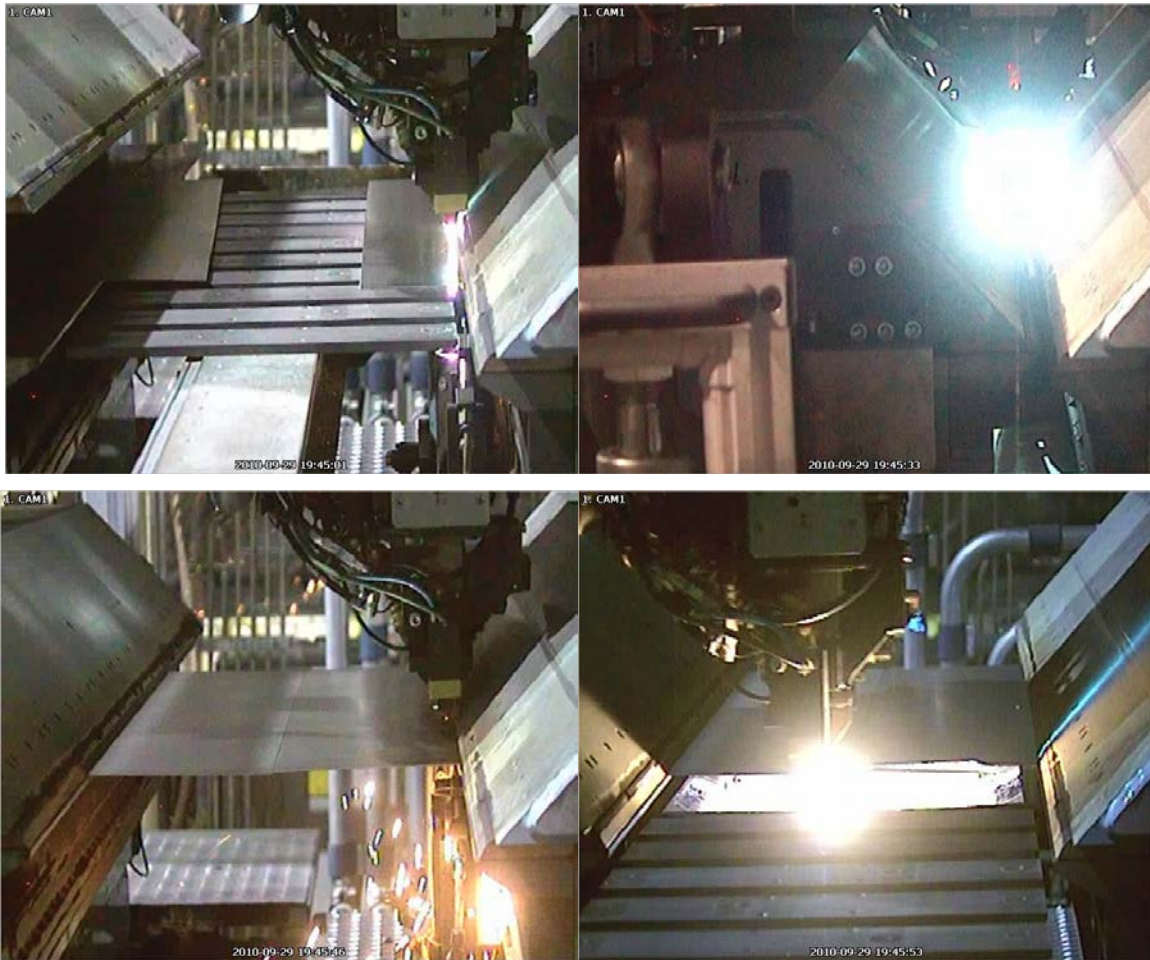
The welding of two coils in detail. Cutting (top left), welding (top right), hole cutting (bottom left), and notching (bottom right) are all done with the same multi-purpose nozzle using the same optical system.
